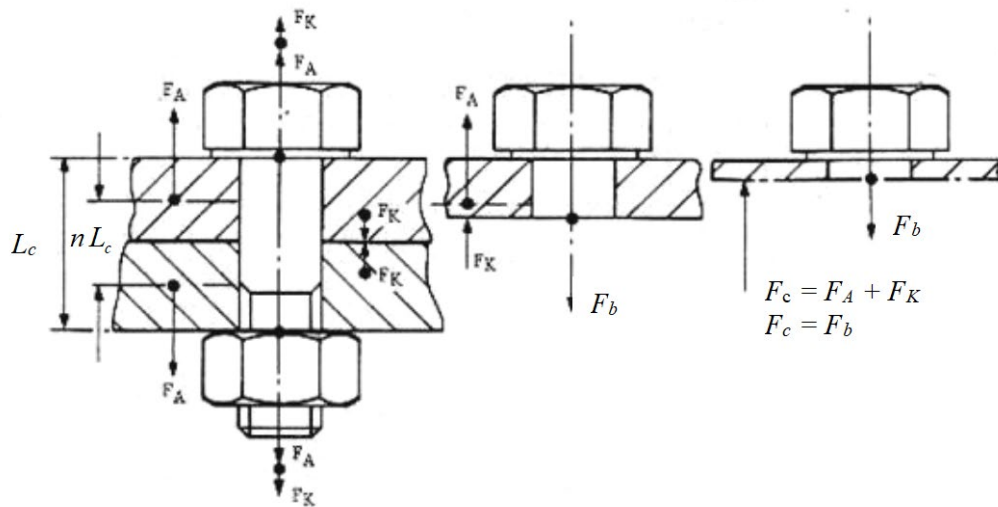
Tension Joint Loading Planes and the Forces Acting within the Joint
